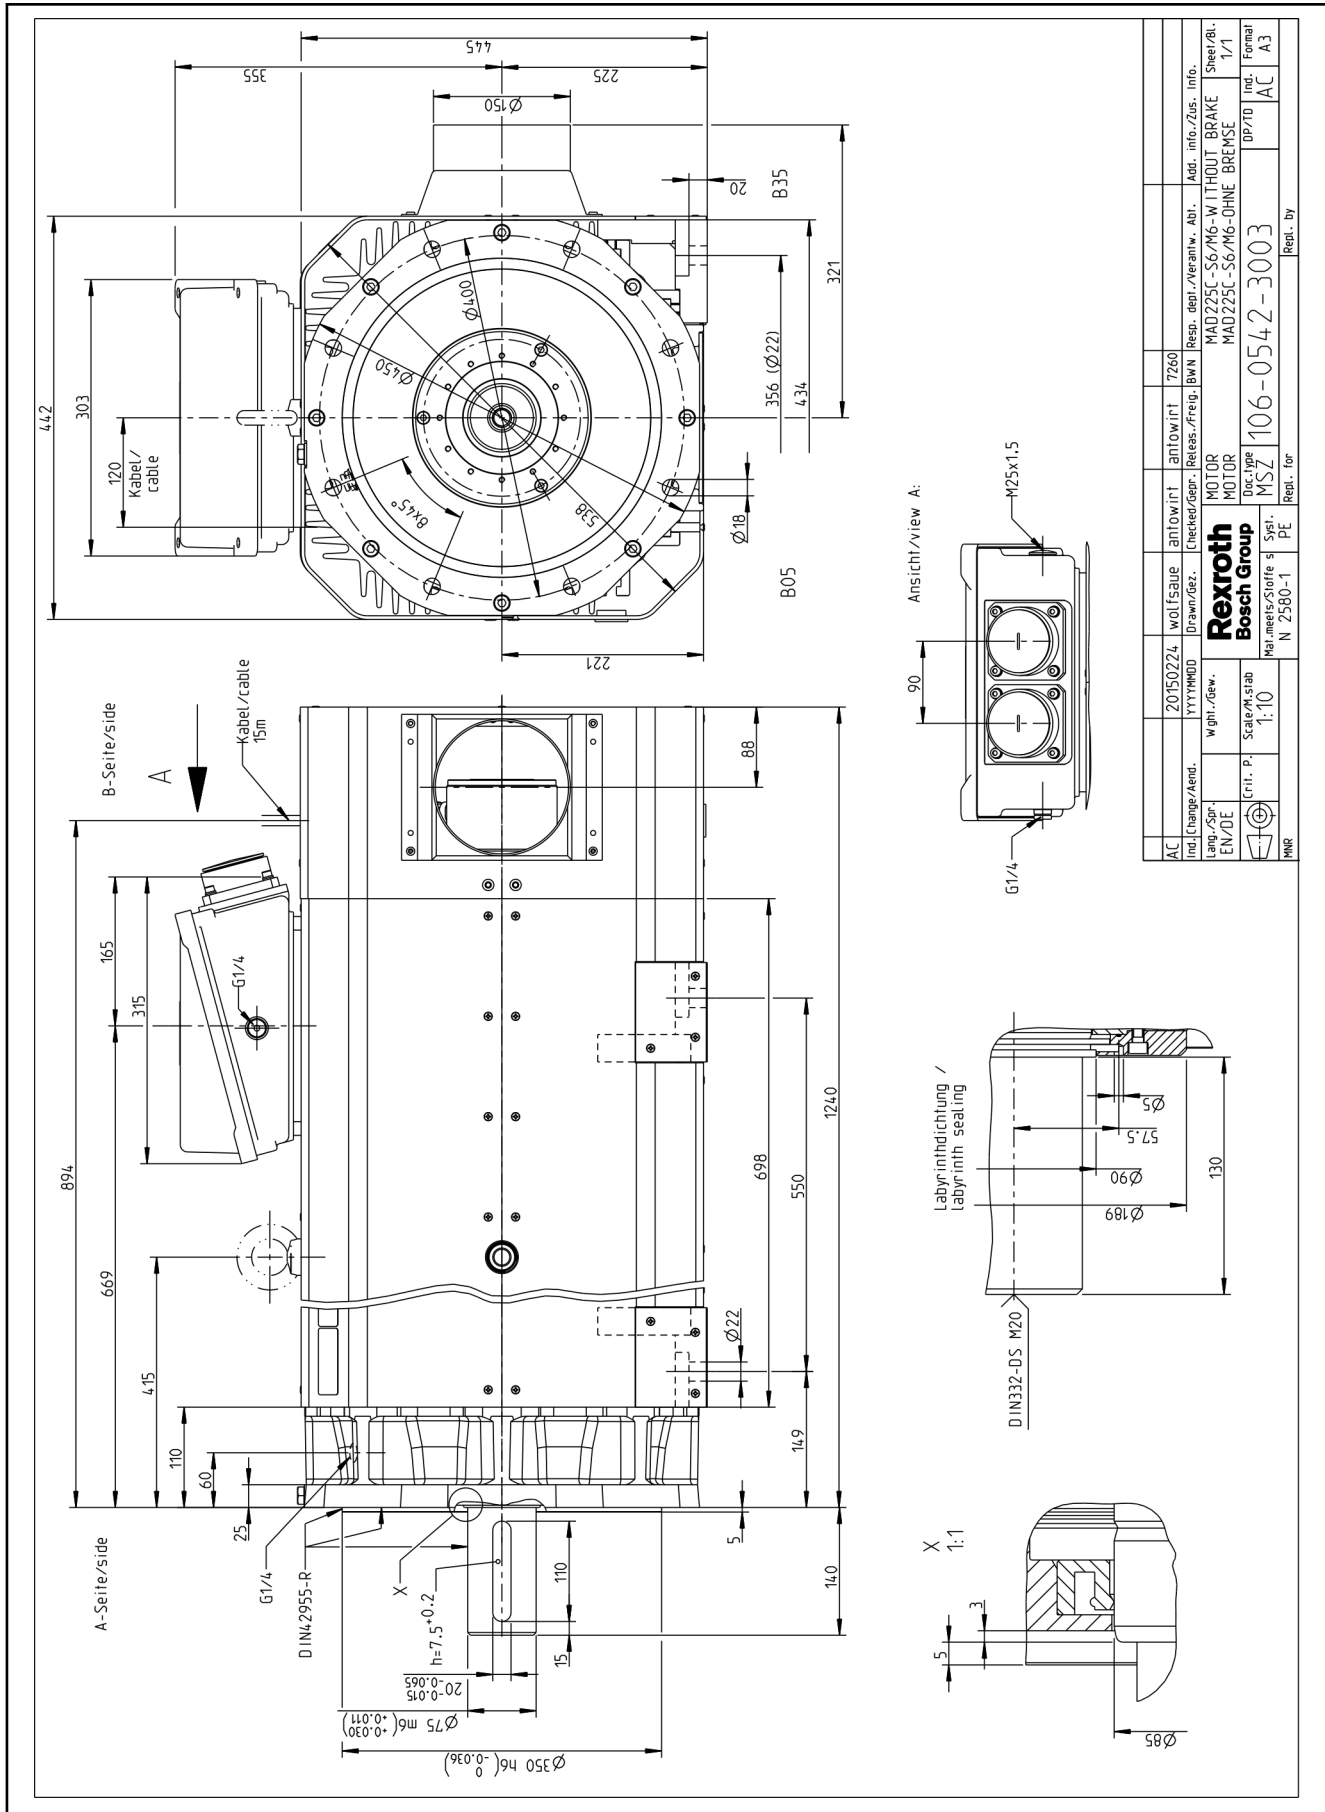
MAD225 with M6/S6 encoder, without brake
